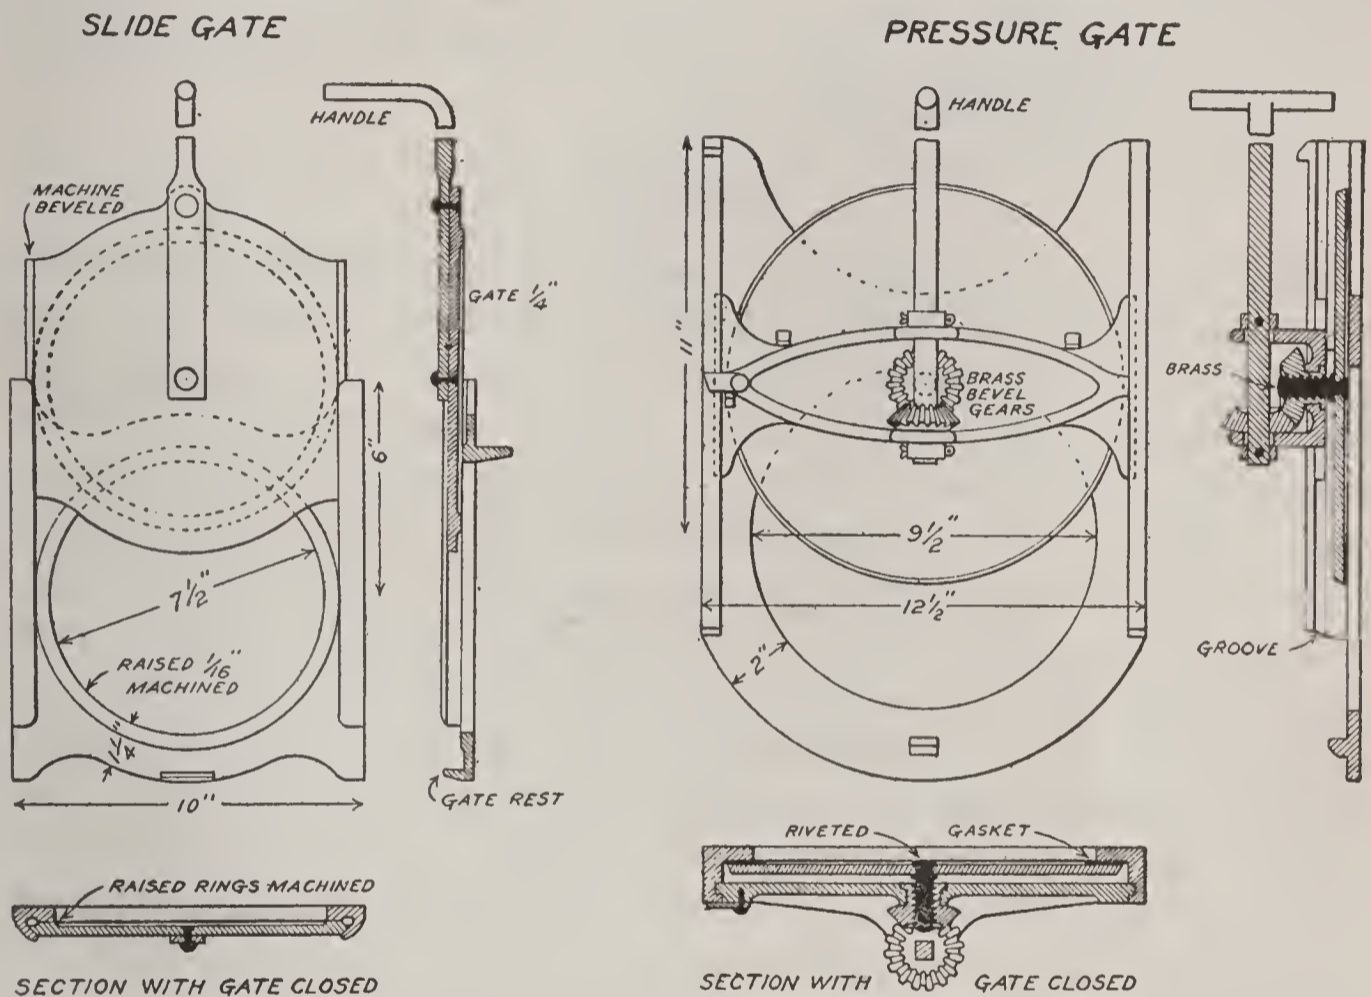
Cast-iron gates for concrete pipe lines and reservoirs.
